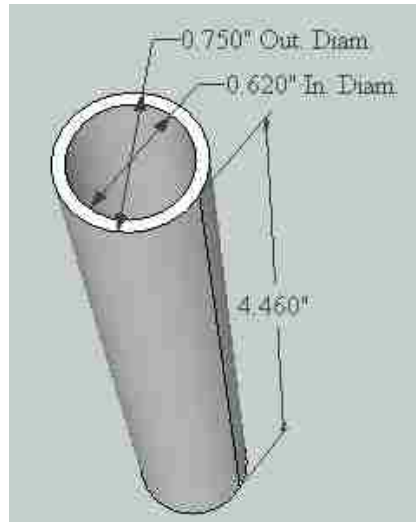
Upper aluminum spacer tubes which connect the upper trimmer and the attachment plate. There are four upper aluminum spacer tubes per applicator.
